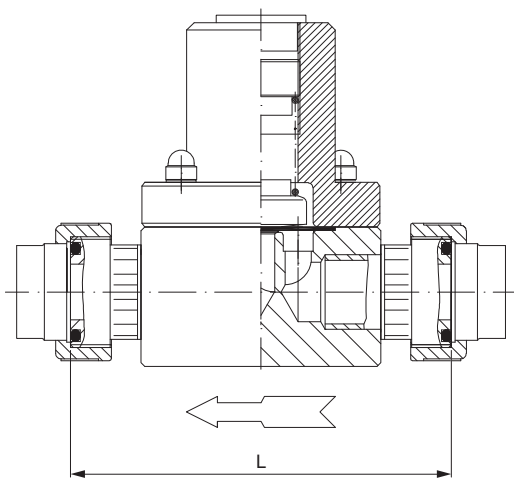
Dimensions PP, PVC, PVDF, no flange
